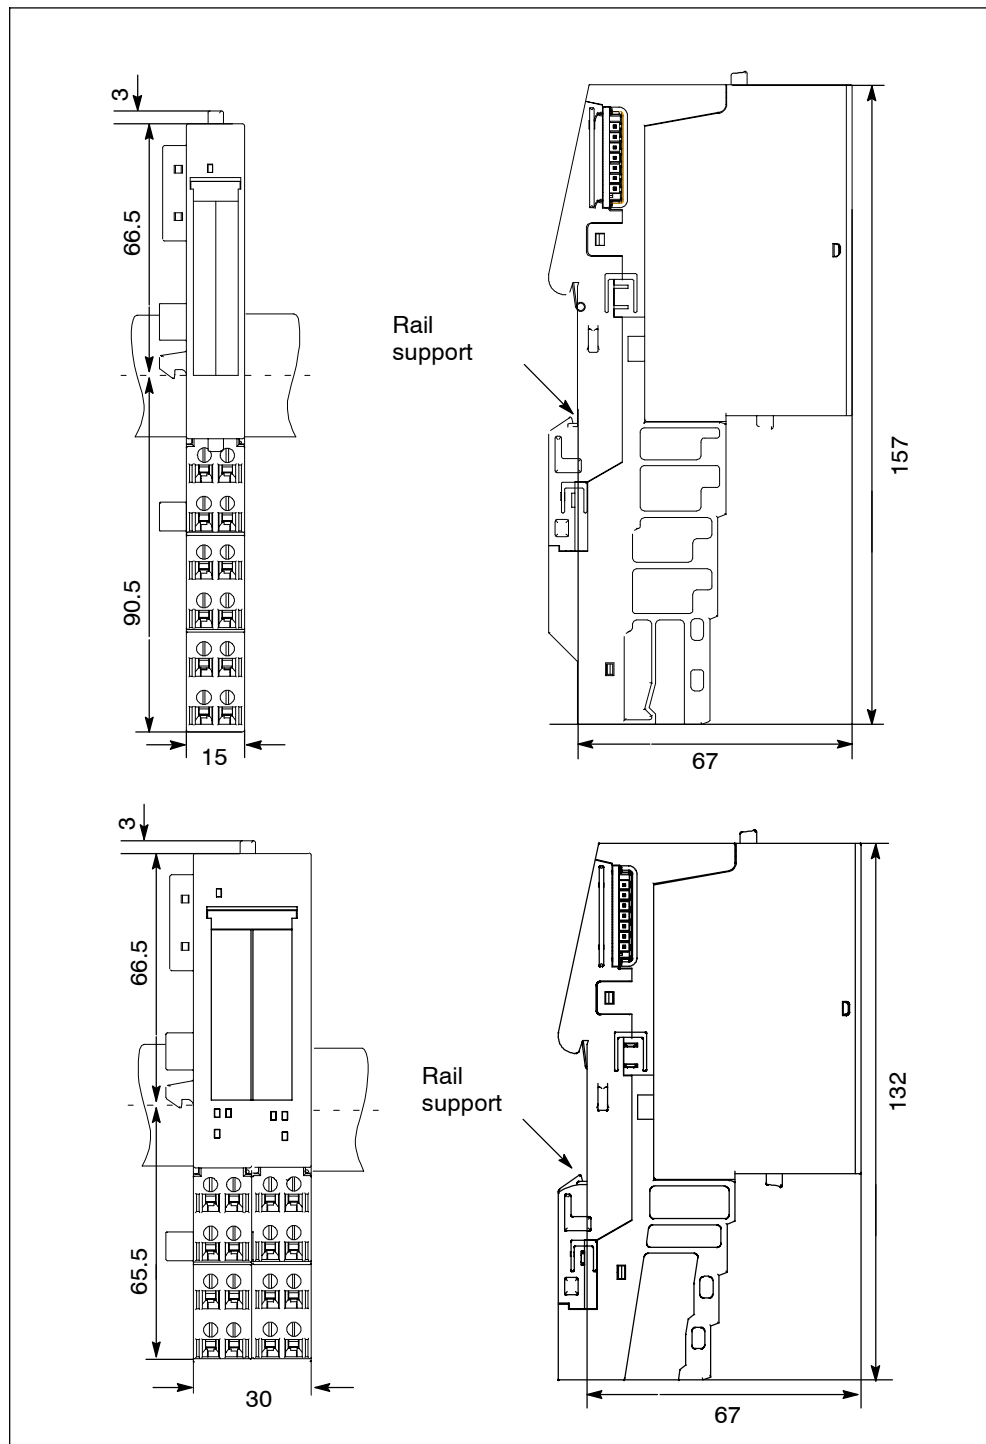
Dimension drawing for terminal modules (screw-type/spring terminals) with an electronic module inserted
